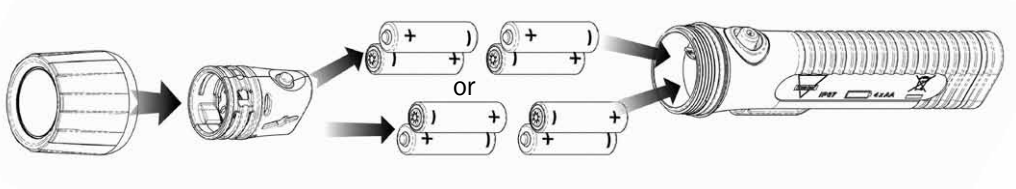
Exploded drawing PetaLux Type 4910... with batteries
